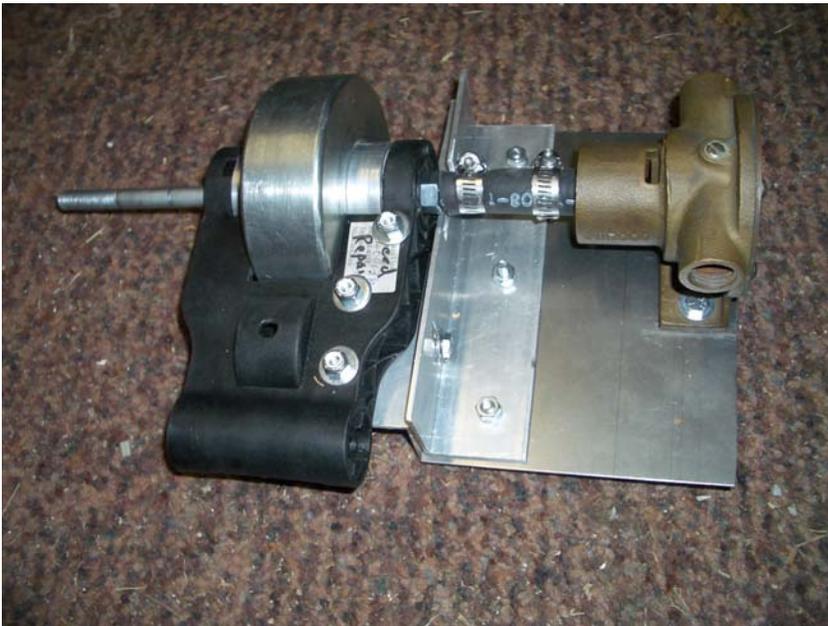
The pump unit mounted to a bracket which attaches to the trainer roller assembly. The pump shaft is coupled to the roller shaft with flexible hose to allow for run out.
